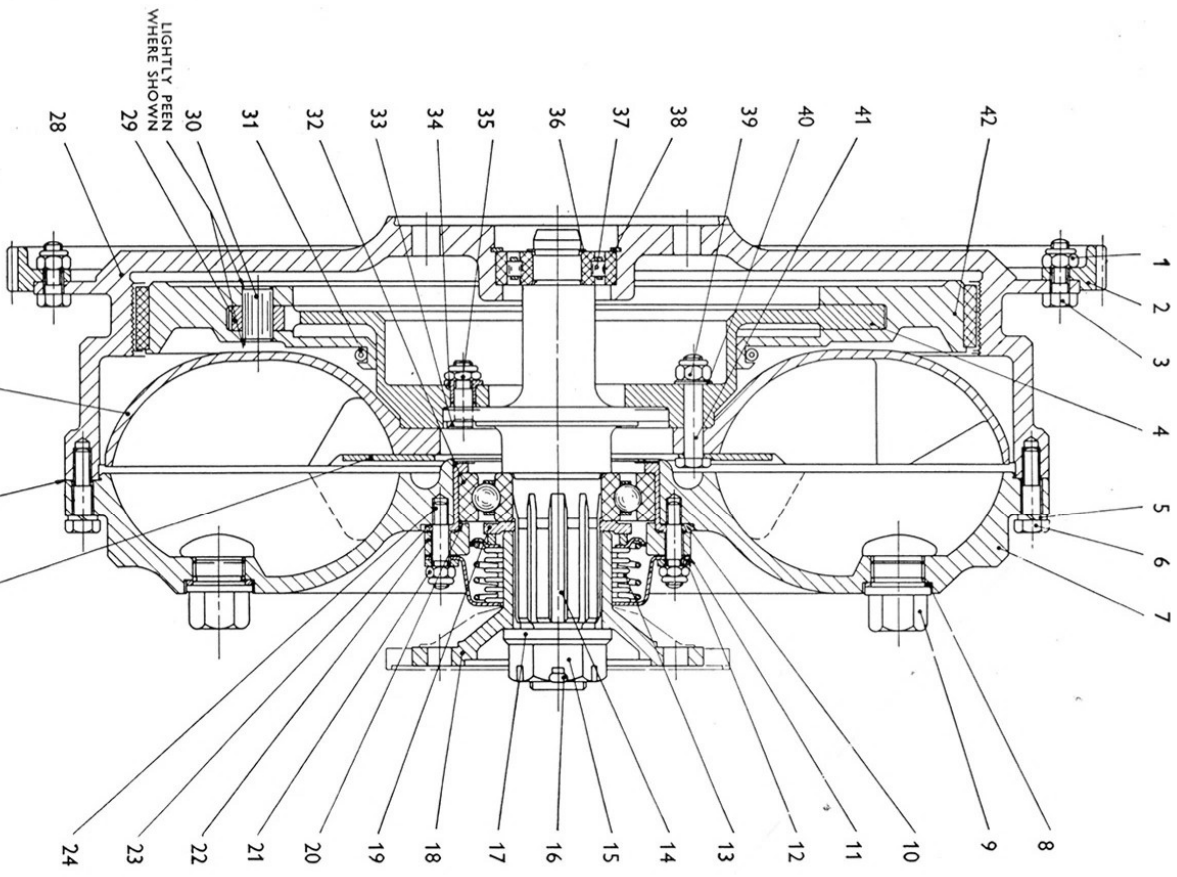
ARRANGEMENT OF THE 18" FLUID CLUTCH
